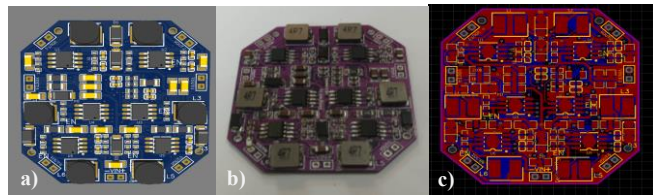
Voltage distribution board of E-Leg, a) 3-D diagram, b) Printed circuit board, c) PCB layout
